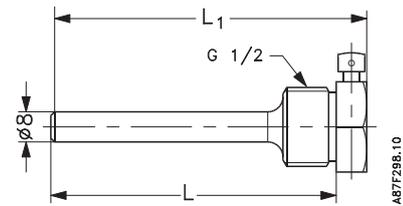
Sensor pocket (brass), dimensions in mm (in)
